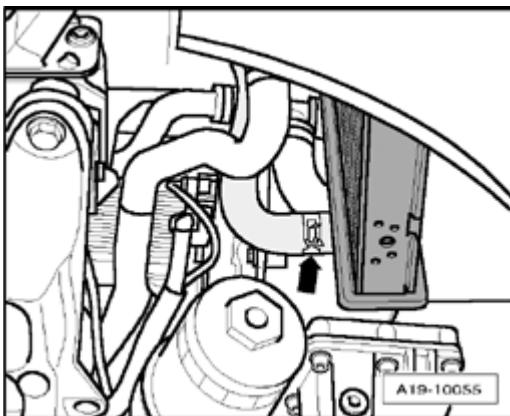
Auxiliary Cooler Lower Right Coolant Hose
